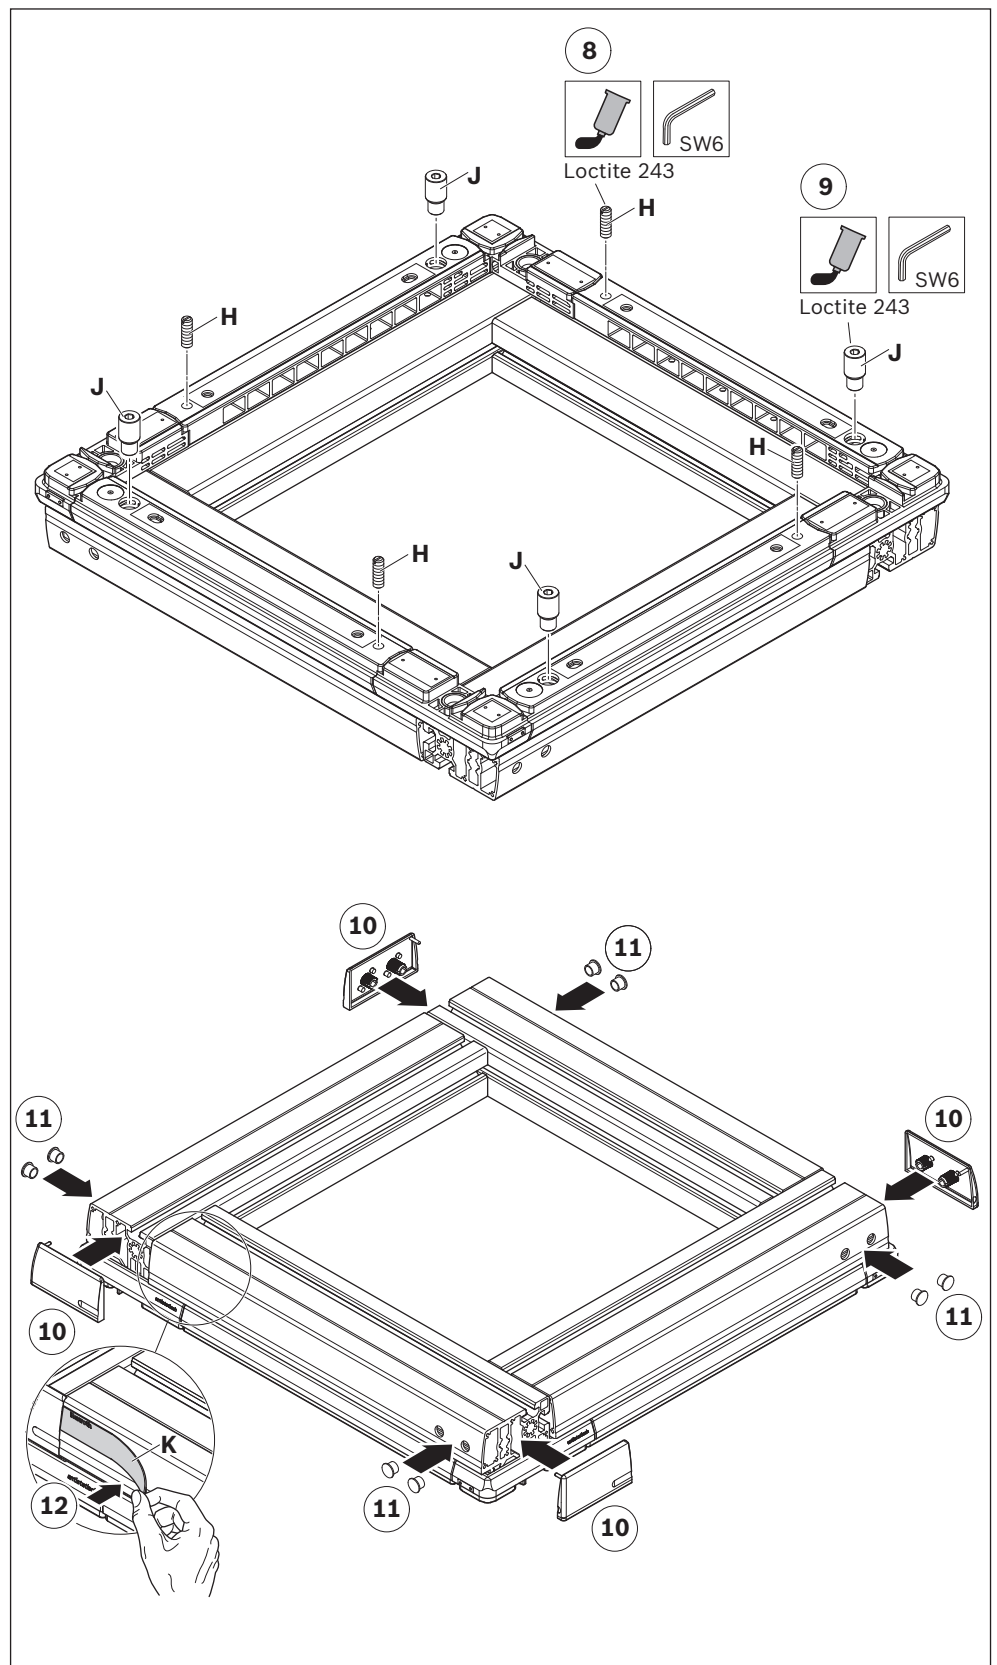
Workpiece pallet WT 2/F-H: Assemble the positioning bushings
